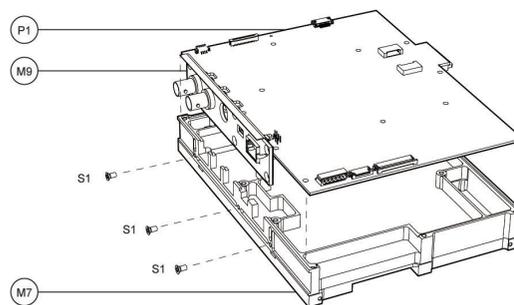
Remove the MAINBOARD with CONNECTOR BRACKET
